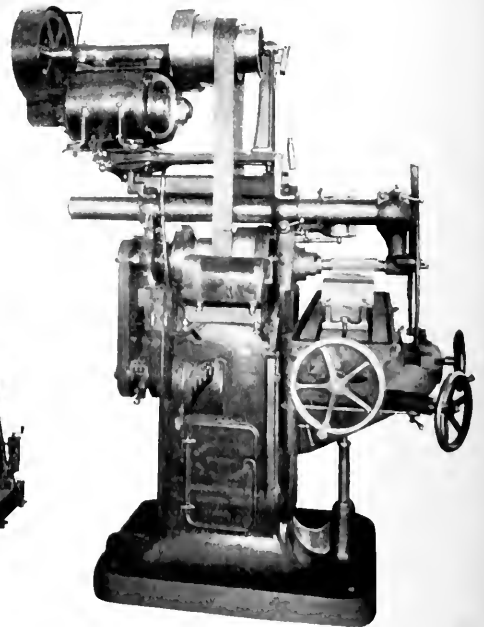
Individual drive. Note extra framework, counter-shafting and bearings. Why not a motor built-in?
